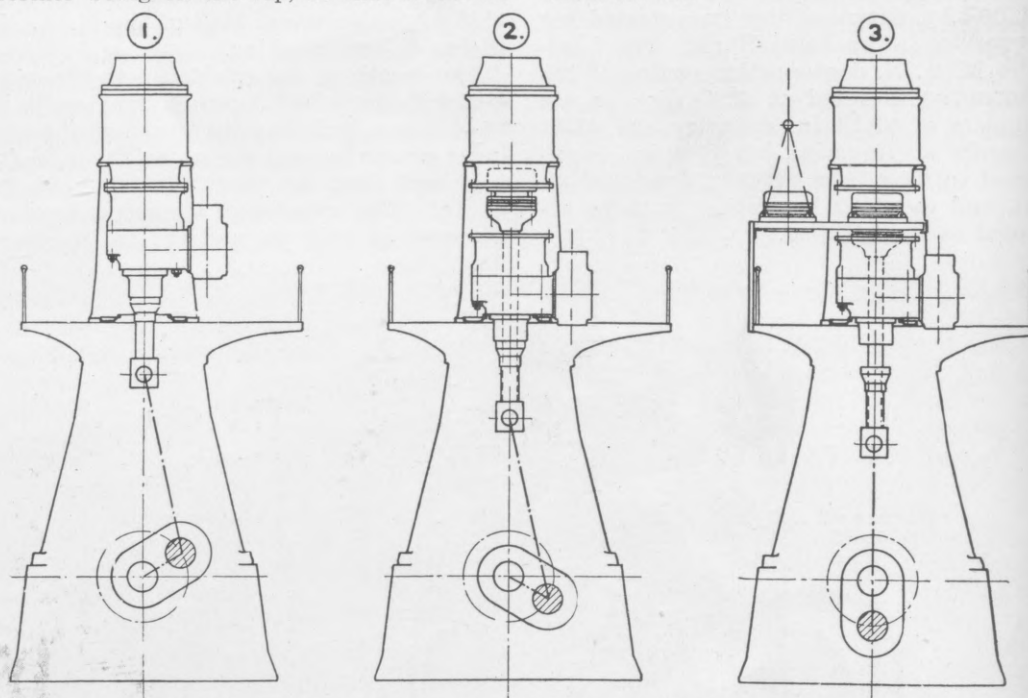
Means for inspecting and removing pistons in Werkspoor double-acting engine
